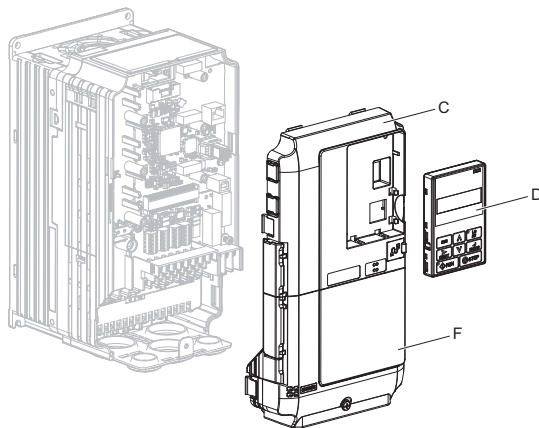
Remove the Keypad, Front Cover, and Terminal Cover
